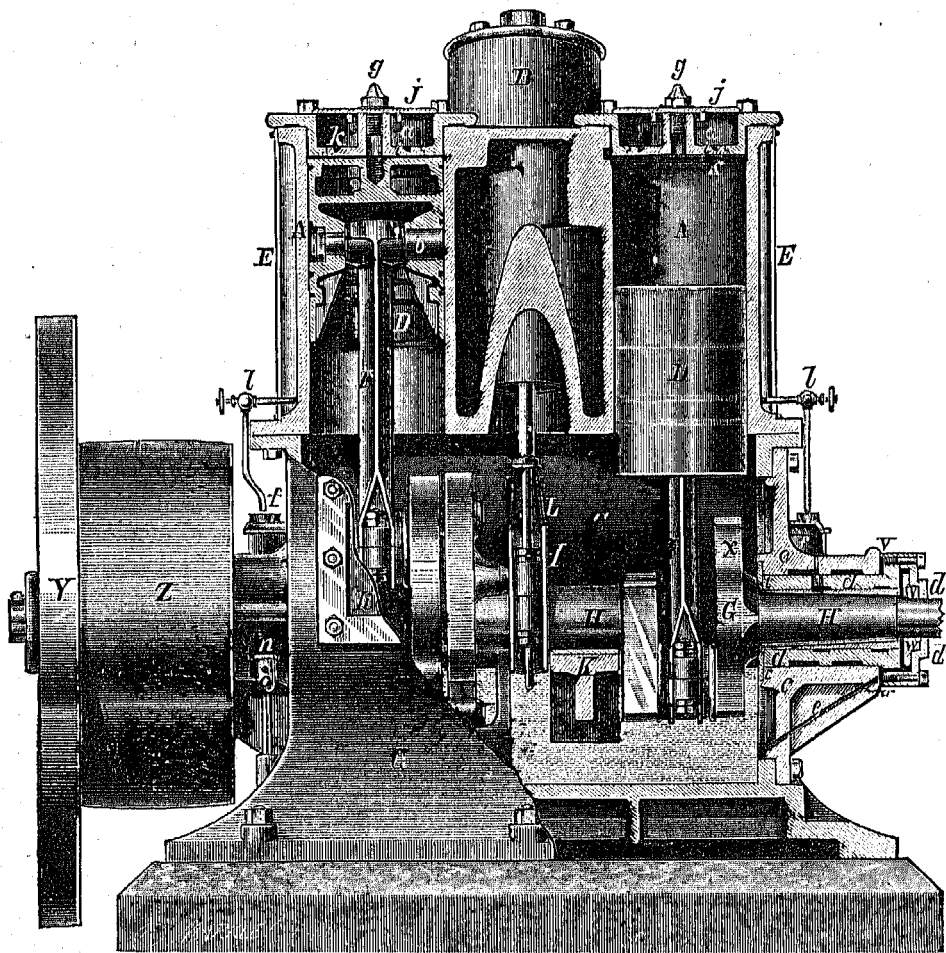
WESTINGHOUSE ENGINE, SECTION THROUGH CYLINDERS.
